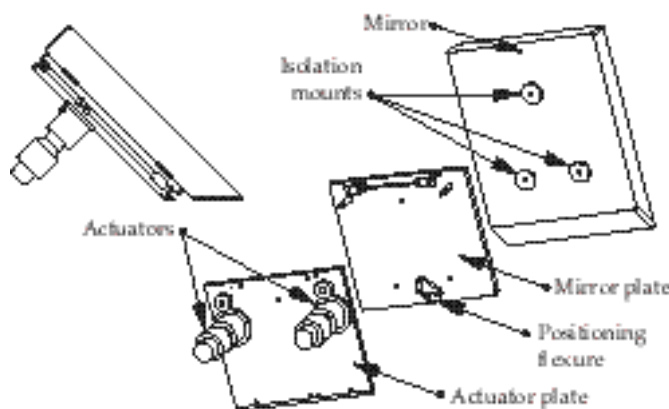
In addition to the mirror, a subassembly includes isolation mounts, positioning flexures, plates, and actuators. (40-00-1097-2311pb01)
